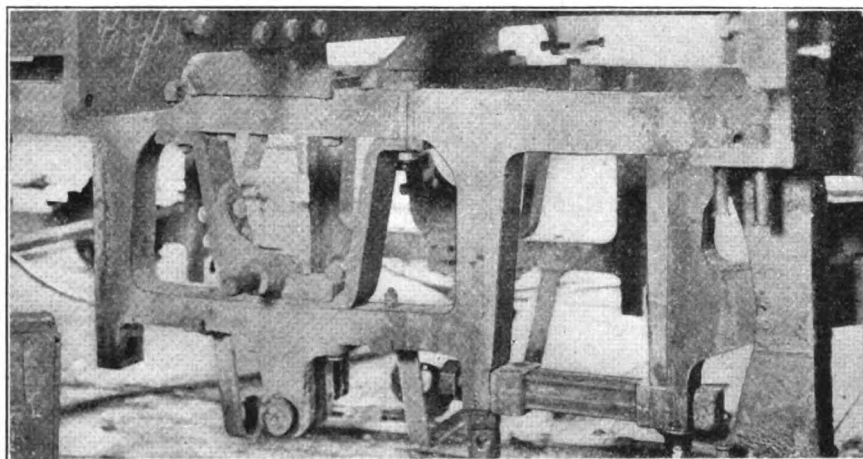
SHOWING HEAT TAKEN, PADS RAMMED IN AND JOB COMPLETED
